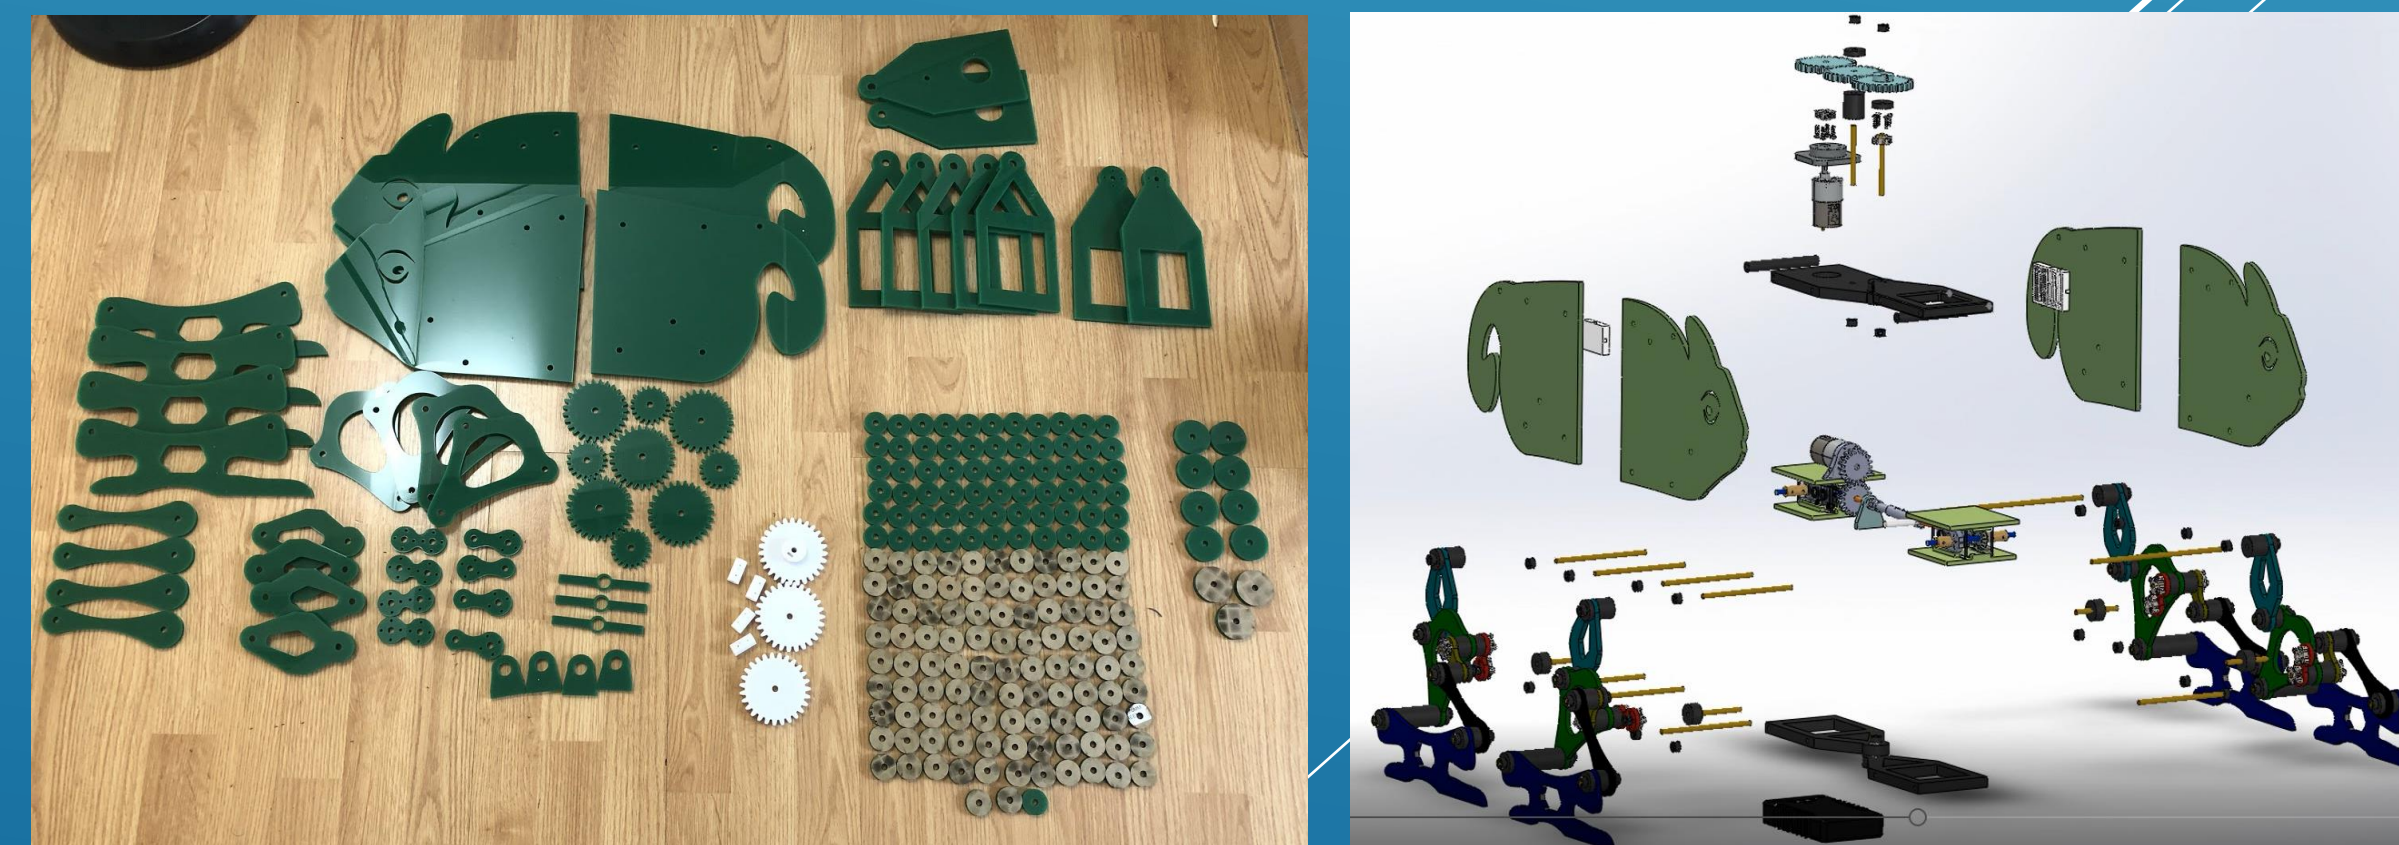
&11: Chassis and Leg Components (L) & Explosive View on SolidWorks (R)
